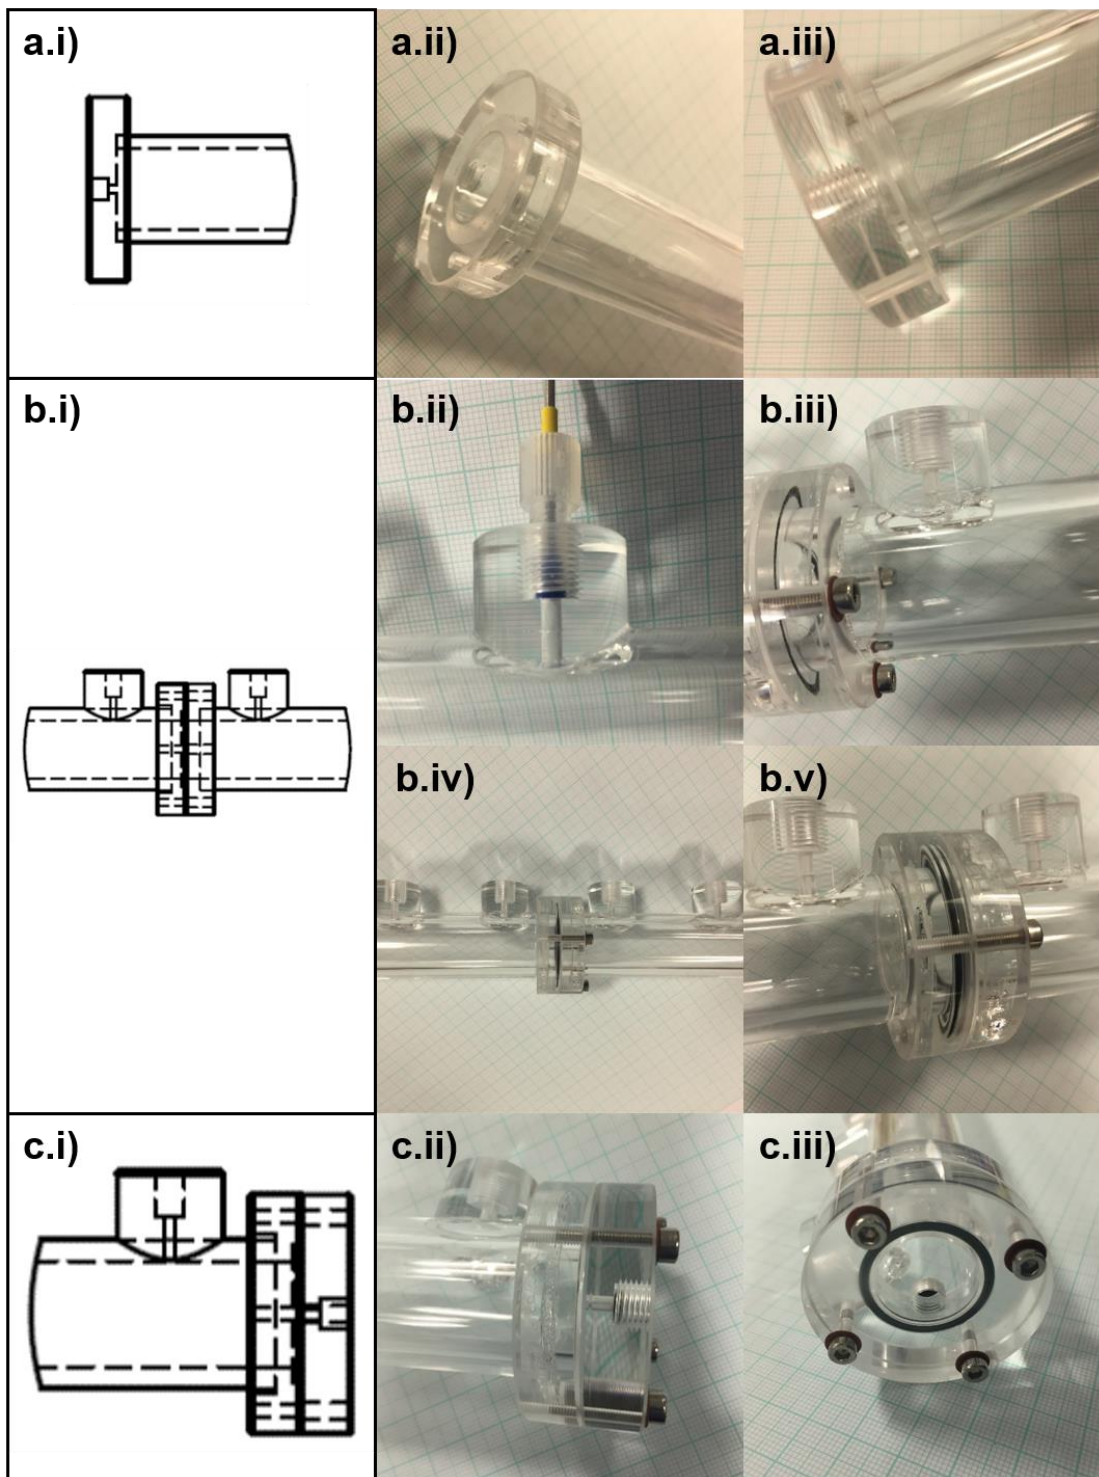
Details and features of the distribution section of the double manifold prototype. The inlet and part of the inlet section are shown in a). The flange connections used to make the prototype modular and the detail of the barrier outlets are presented in b). The end-port, opposite to the inlet, used in the fill-up procedure is presented in c)
